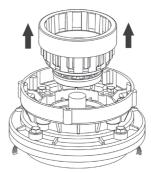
I - Disassembly of the drive magnet assembly
